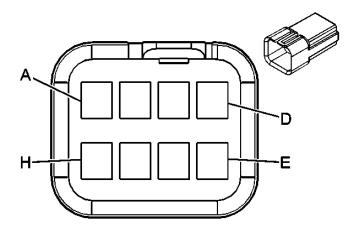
Outside Rearview Mirror - Passenger C1 Connector End View
